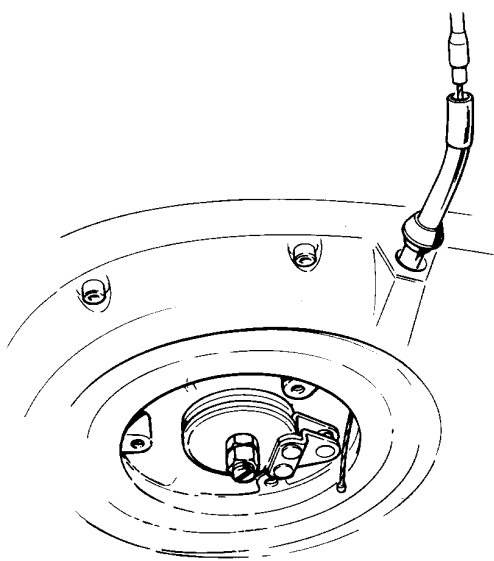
Clutch Cable Removal at the Primary Chaincase
